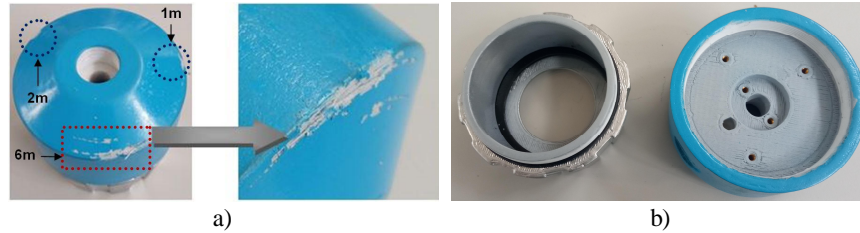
Enclosure after the impact test: a) main damages, b) separated enclosure parts
